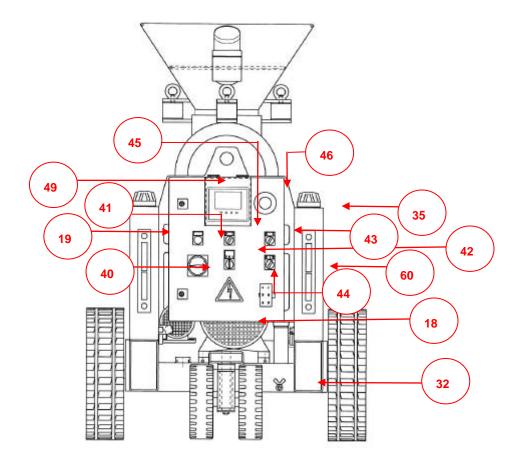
Overview drawing of the TSN / B1N Shotcrete Machine, rear view
